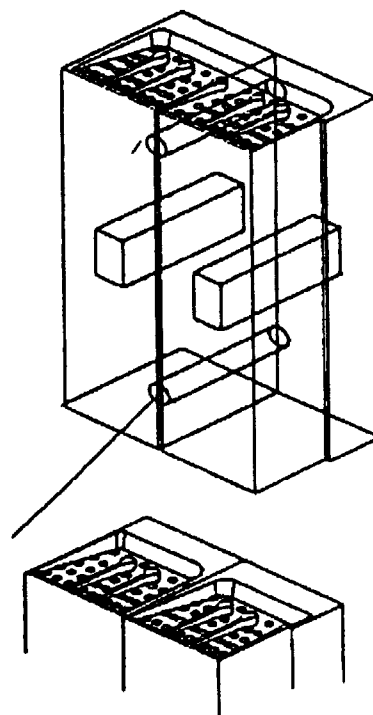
(12) Drilling of slit ends and finish machining of headers
